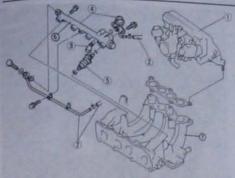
Fuel injectors, pressure regulator and related components (Sec 32)
